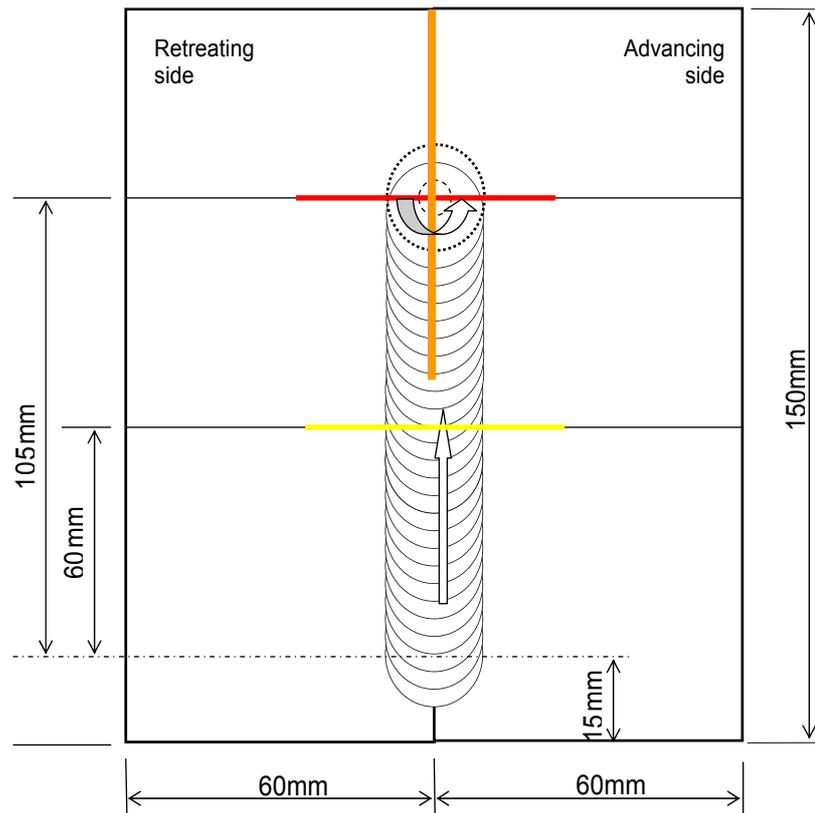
The layout and sizes of the welded panels used in this work. The coloured lines represent placement of copper marker material: orange= longitudinal, red= transverse at exit hole, yellow= transverse at weld centre.
